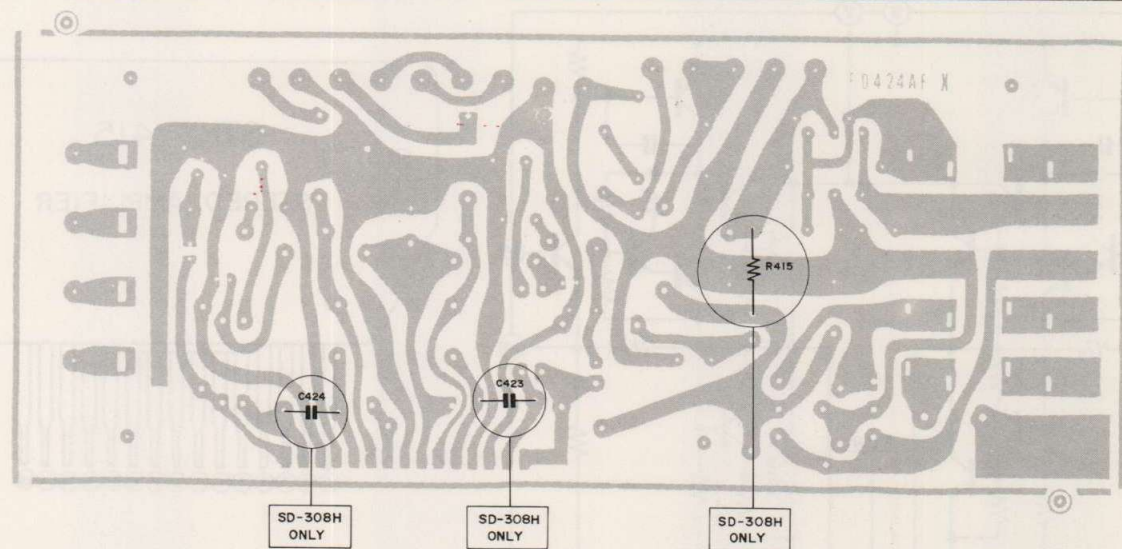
PARTS LAYOUT ON NEW POWER AMP BOARD
